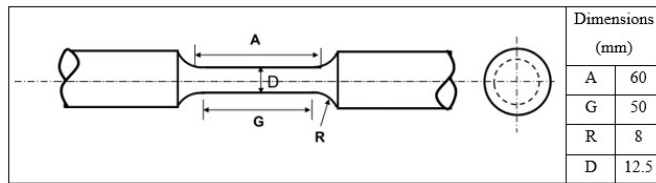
Tensile testing specimen ("dog bone") with dimensions
